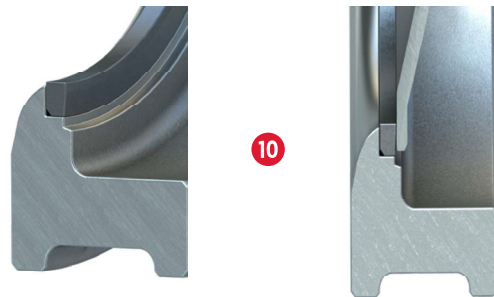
Seat Ring Hard Seat Close-Up Cutaway Views.
